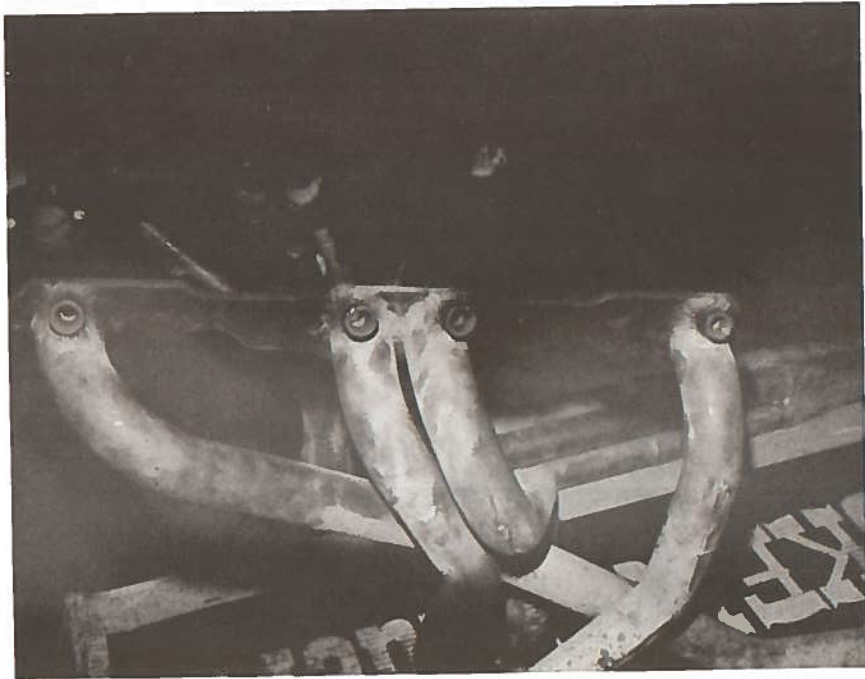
HOOKER TUNED EXHAUST HEADERS -
